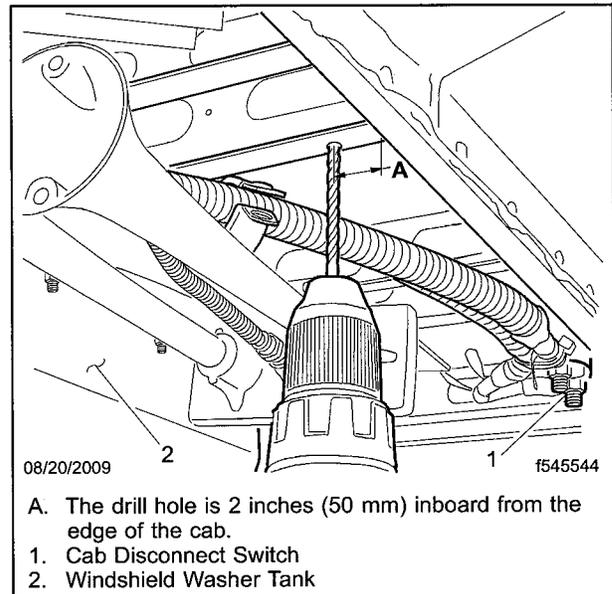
, Drilling the Hole in the Forward Cab Crossmember
